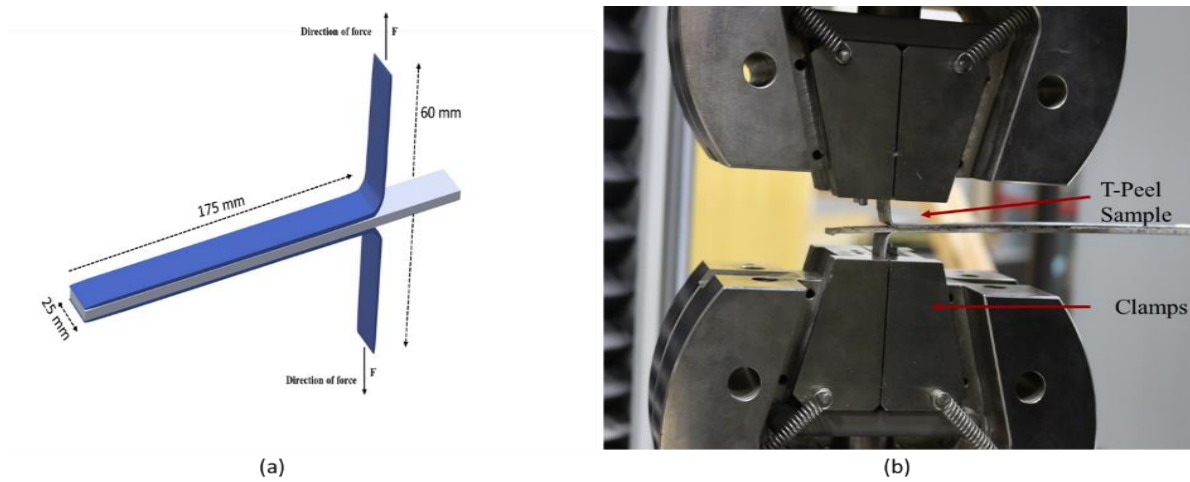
(a) Schematic view of specimen for T-Peel test (b) T-Peel sample mounted on the machine
